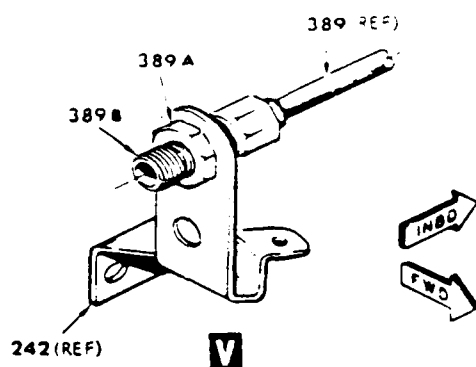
RH Aft Strut Assembly (Sheet 12 of 18)
